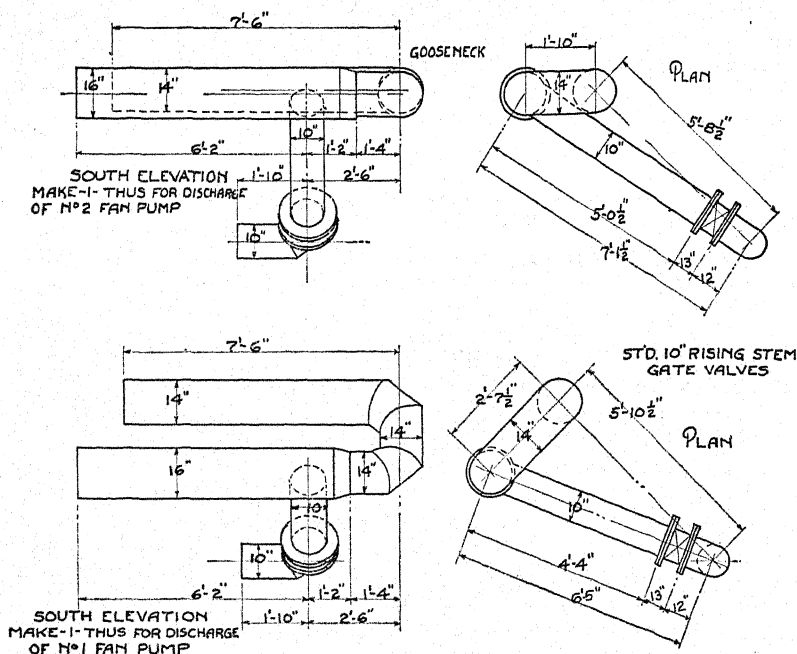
Details of pipe fitting fabricated by arc welding.
